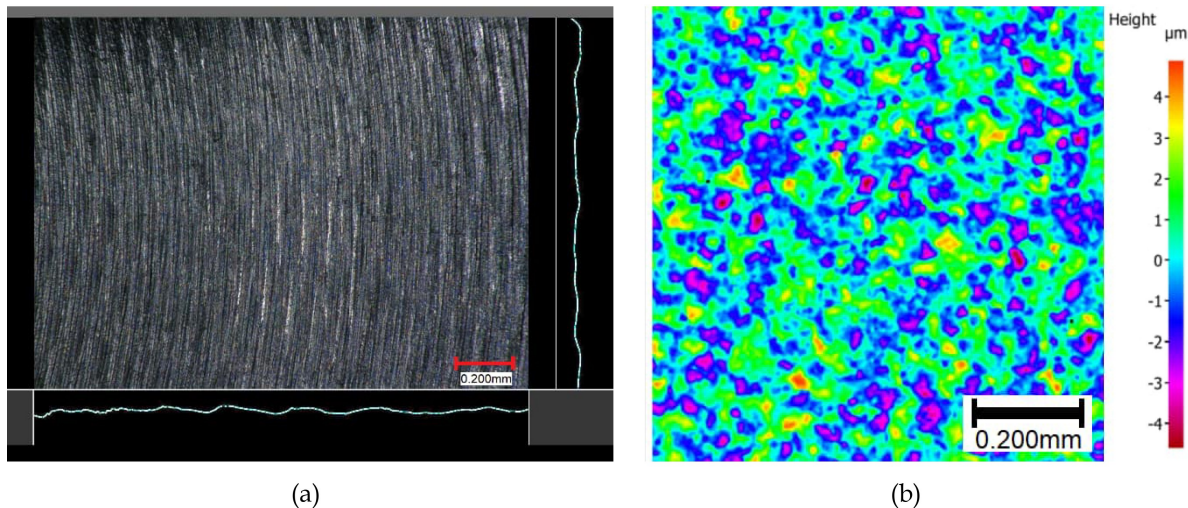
Surface roughness results: a) forming tool tip at radius, b) titanium sheet blank.
